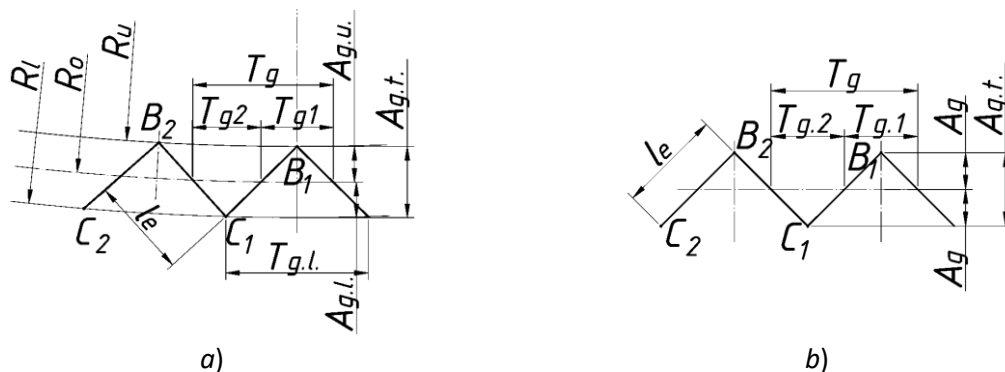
Parameters of triangular profile microrelief grooves: (a) formed on a conical surface according to the scheme of groove arrangement in concentric circles with identical geometric parameters; (b) formed on a flat surface
